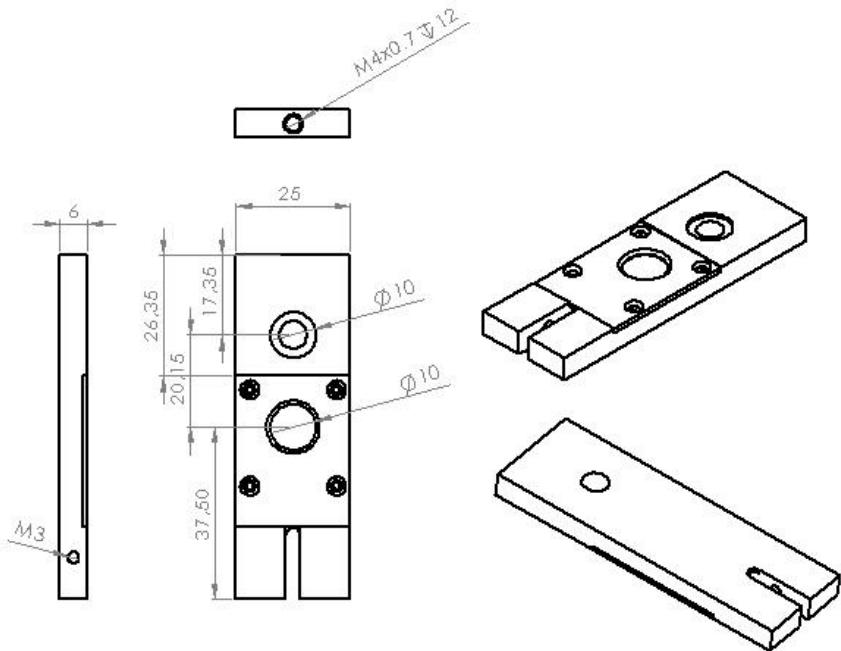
Scheme of the aluminum slide with dimensional specifications. All dimensions are in mm. General tolerances are ± 0.1 mm.
